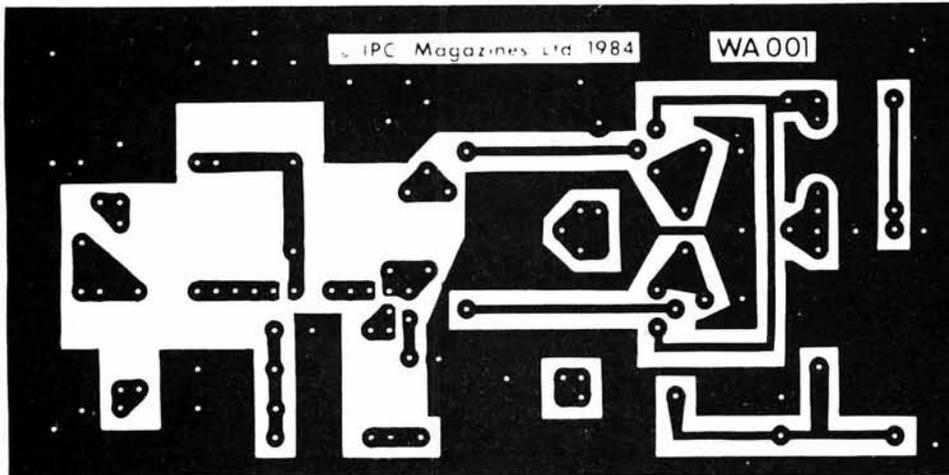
Full size p.c.b. track pattern and component layout for Module 2, the VFO/Doubler
